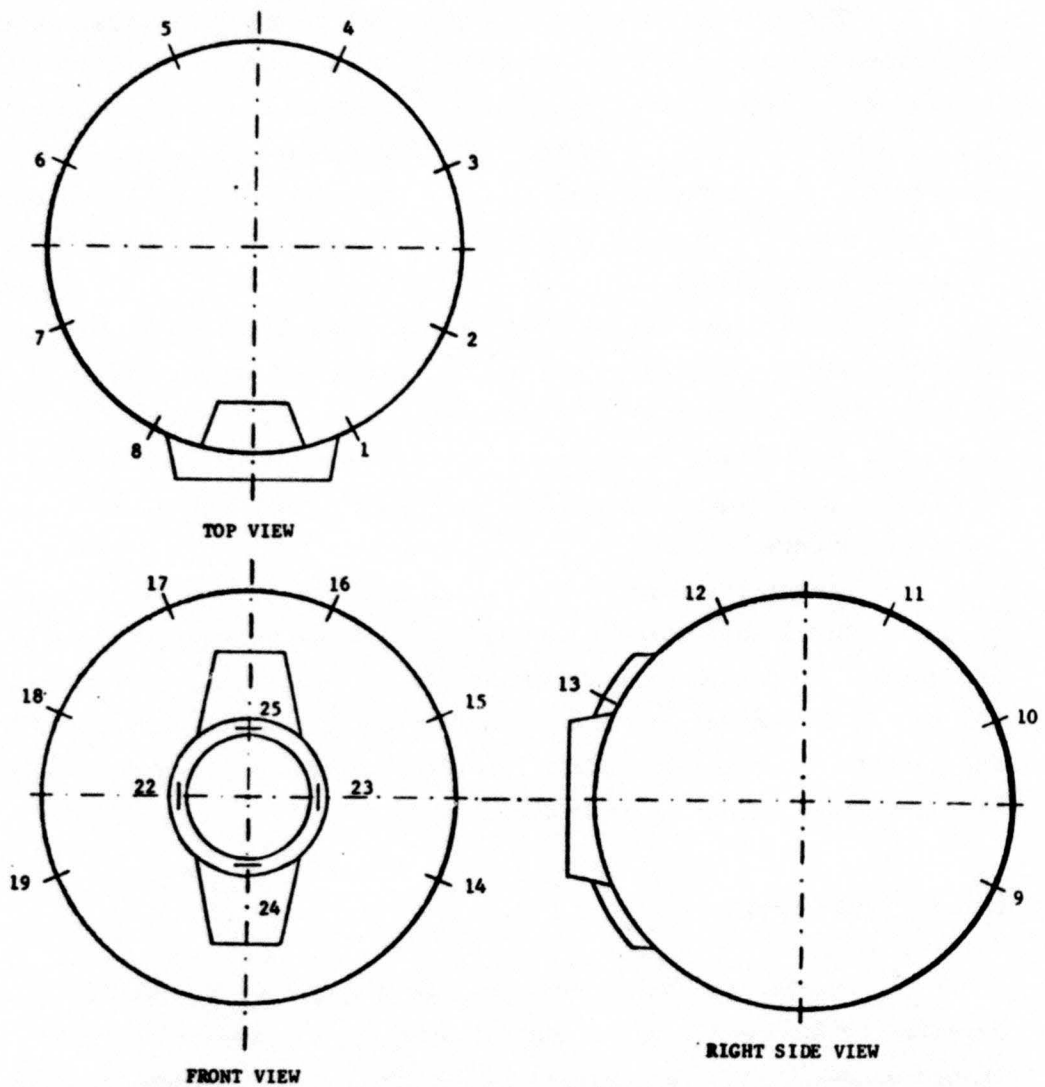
LOCATION OF FIDUCIAL MARKS ON THE FIRST 5-FT DIAMETER EXPLOSION CONTAINMENT VESSEL.
